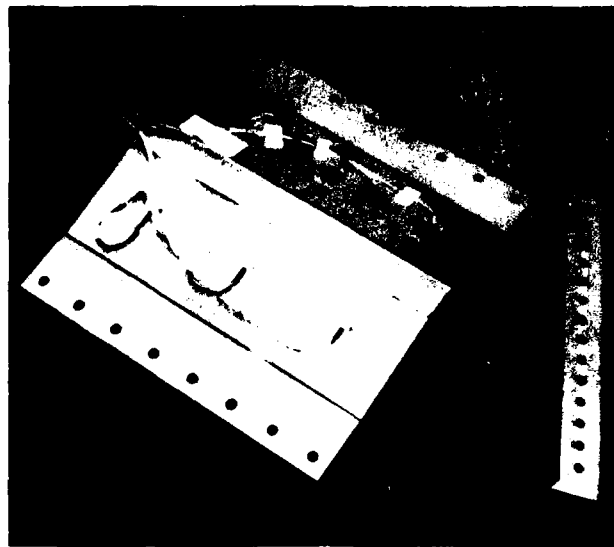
Typical Failure of Frame Tee Tension Pull-off Panels
